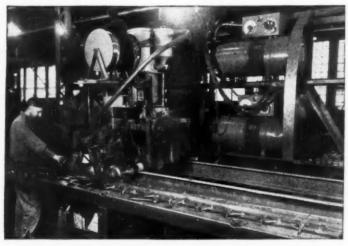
Automatic welding process in operation with fixture arrangement for clamping the work in the foreground.
